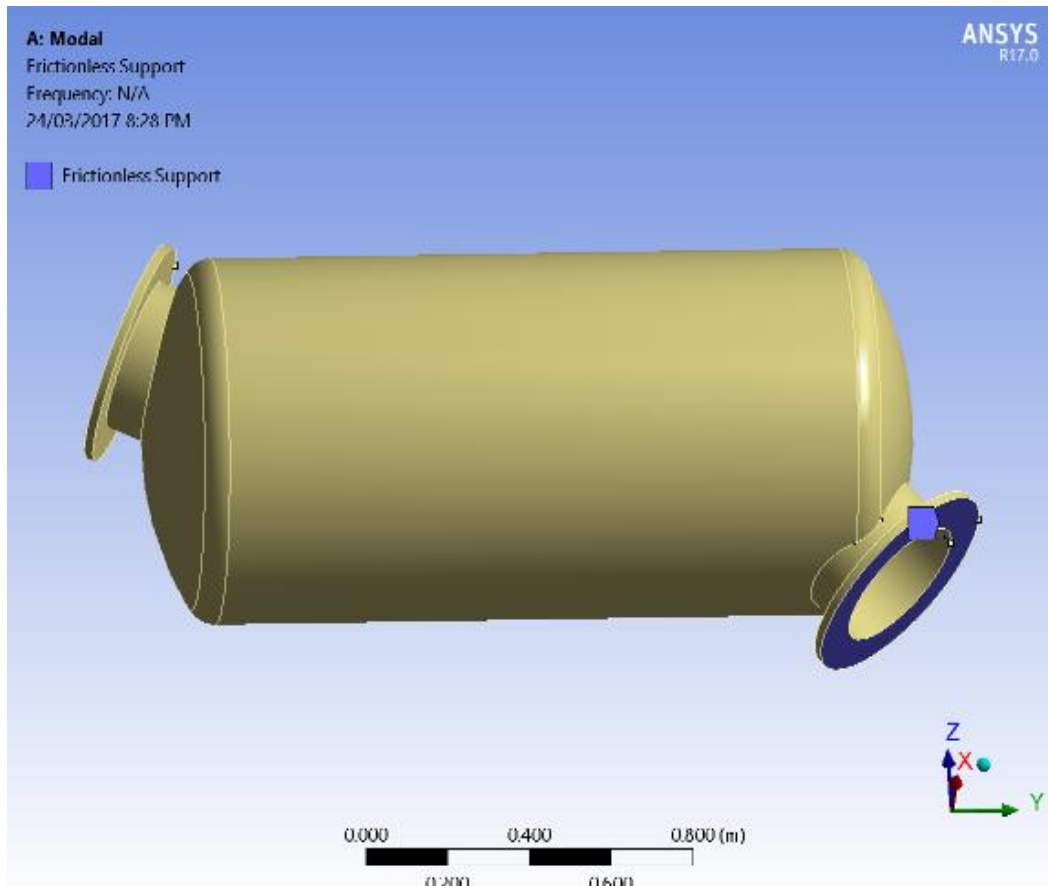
Muffler LMM, Constraint of "Frictionless Support" on Outlet Flange Face
